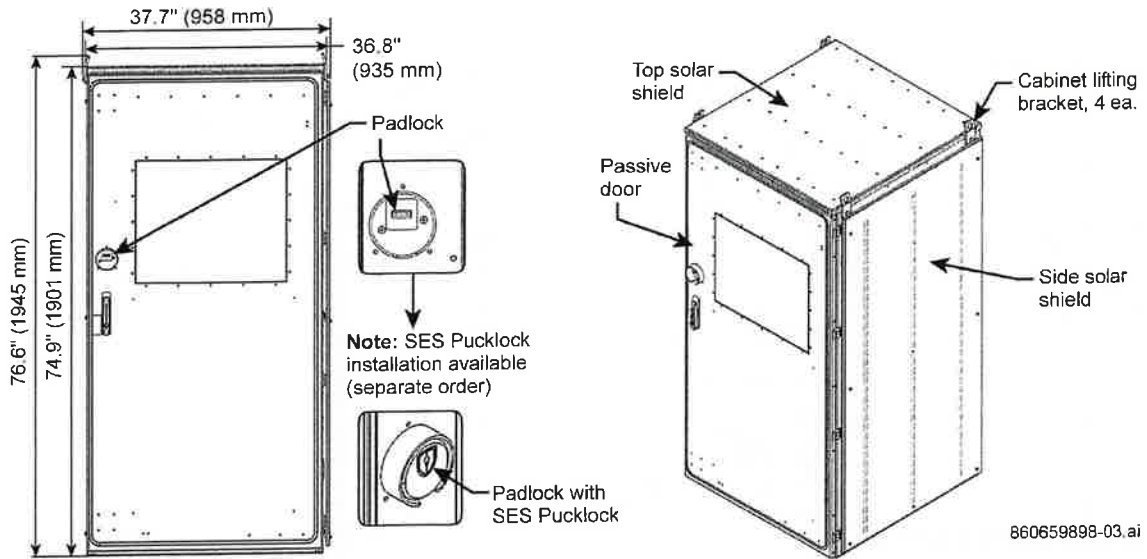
Front Views – CMC74-36B, Passive Door, NiCd
